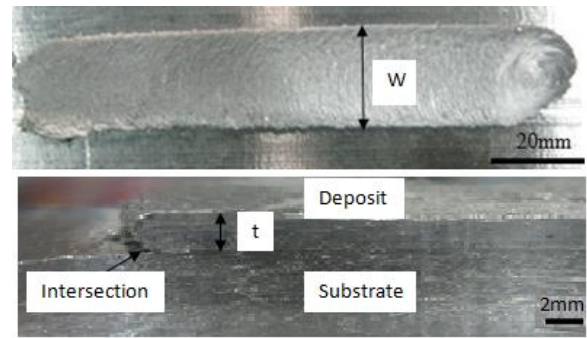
Geometrical Dimensions of the deposit on the coated specimen.
